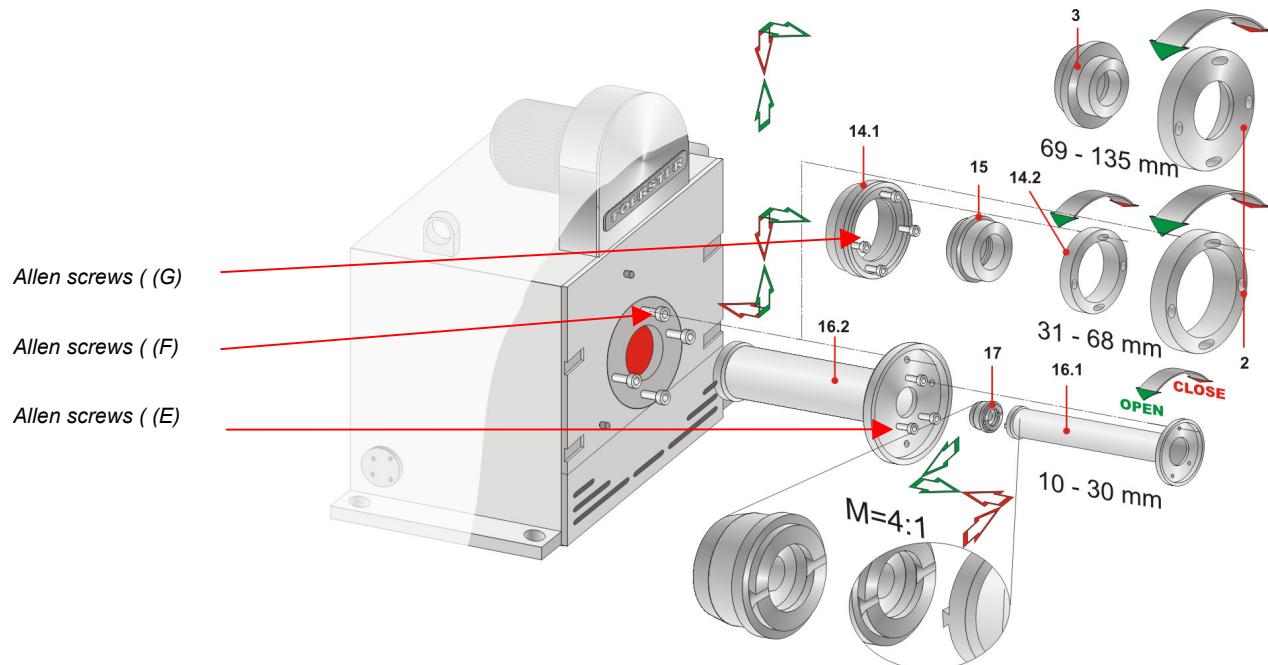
Nozzle changing exit side, legend see Chap. 2.7
